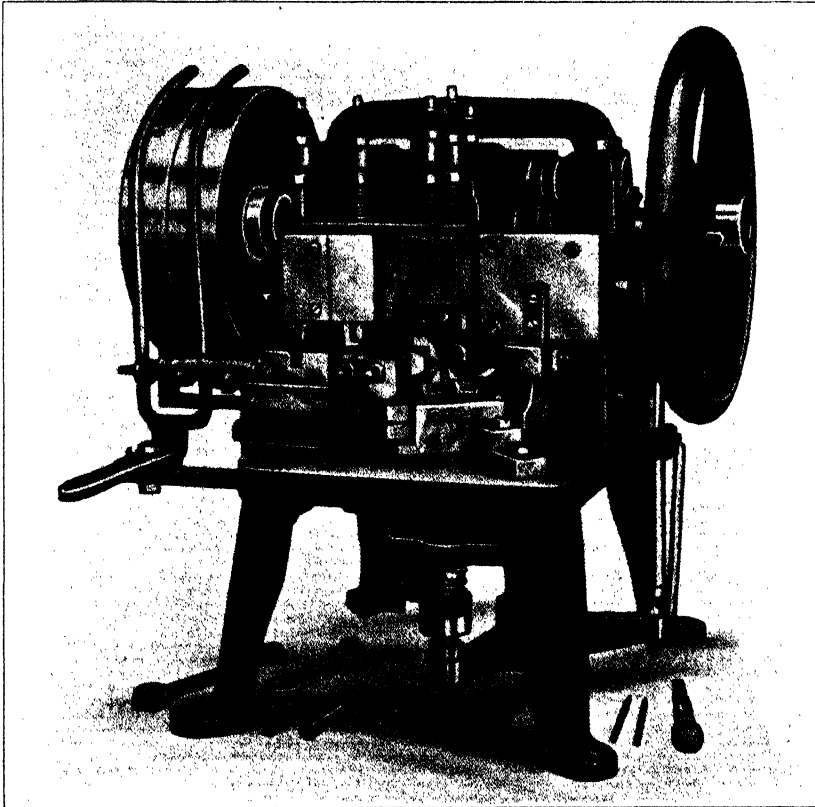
TRACE CHAIN MAKING MACHINE.
